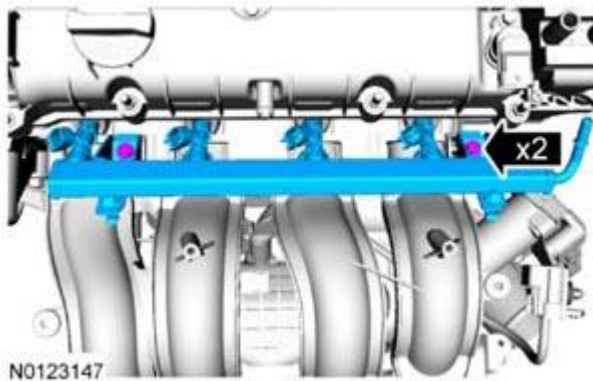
Identifying Fuel Rail Assembly And Bolts
